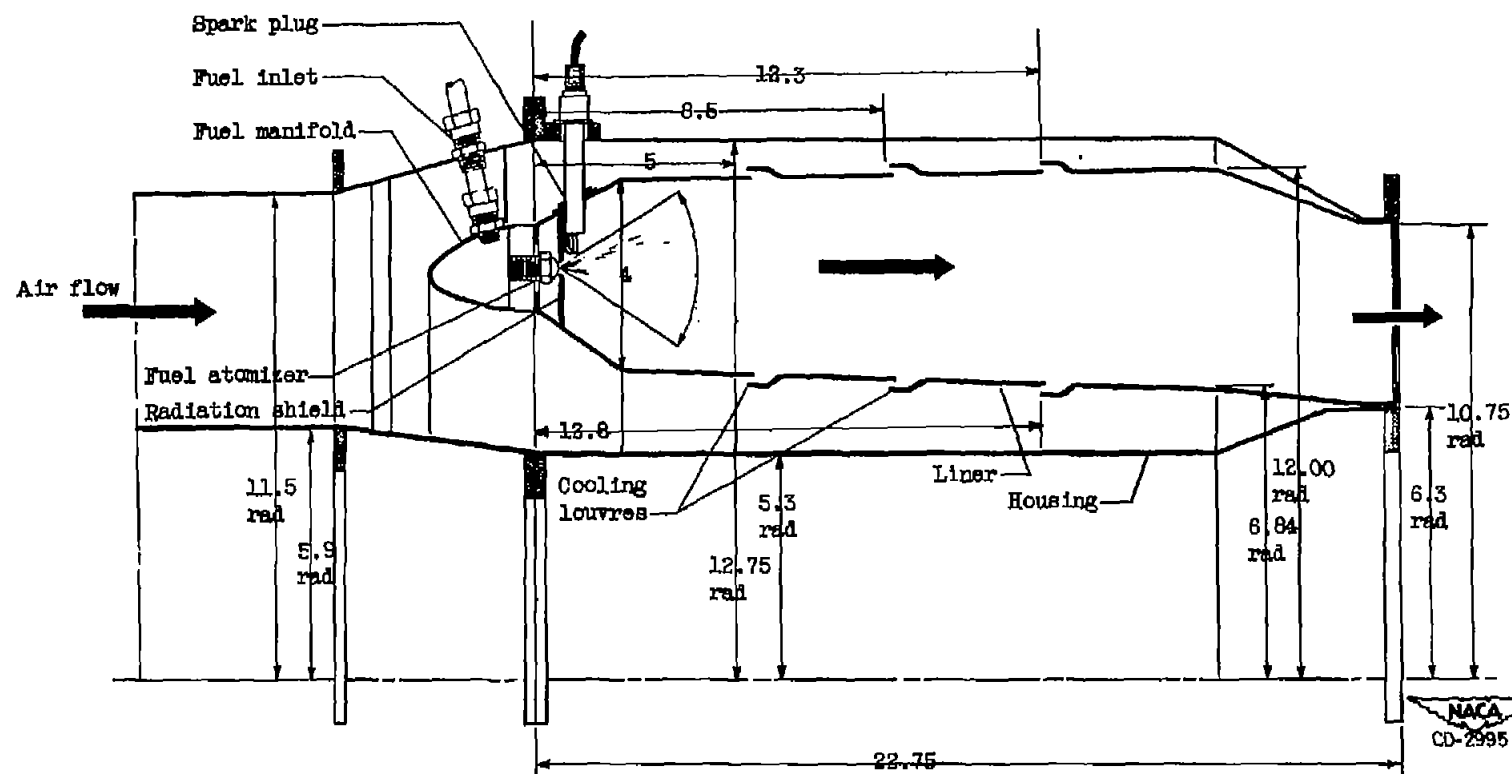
Longitudinal cross-sectional view of model 15 combustor and housing. (Dimensions are in inches.)
